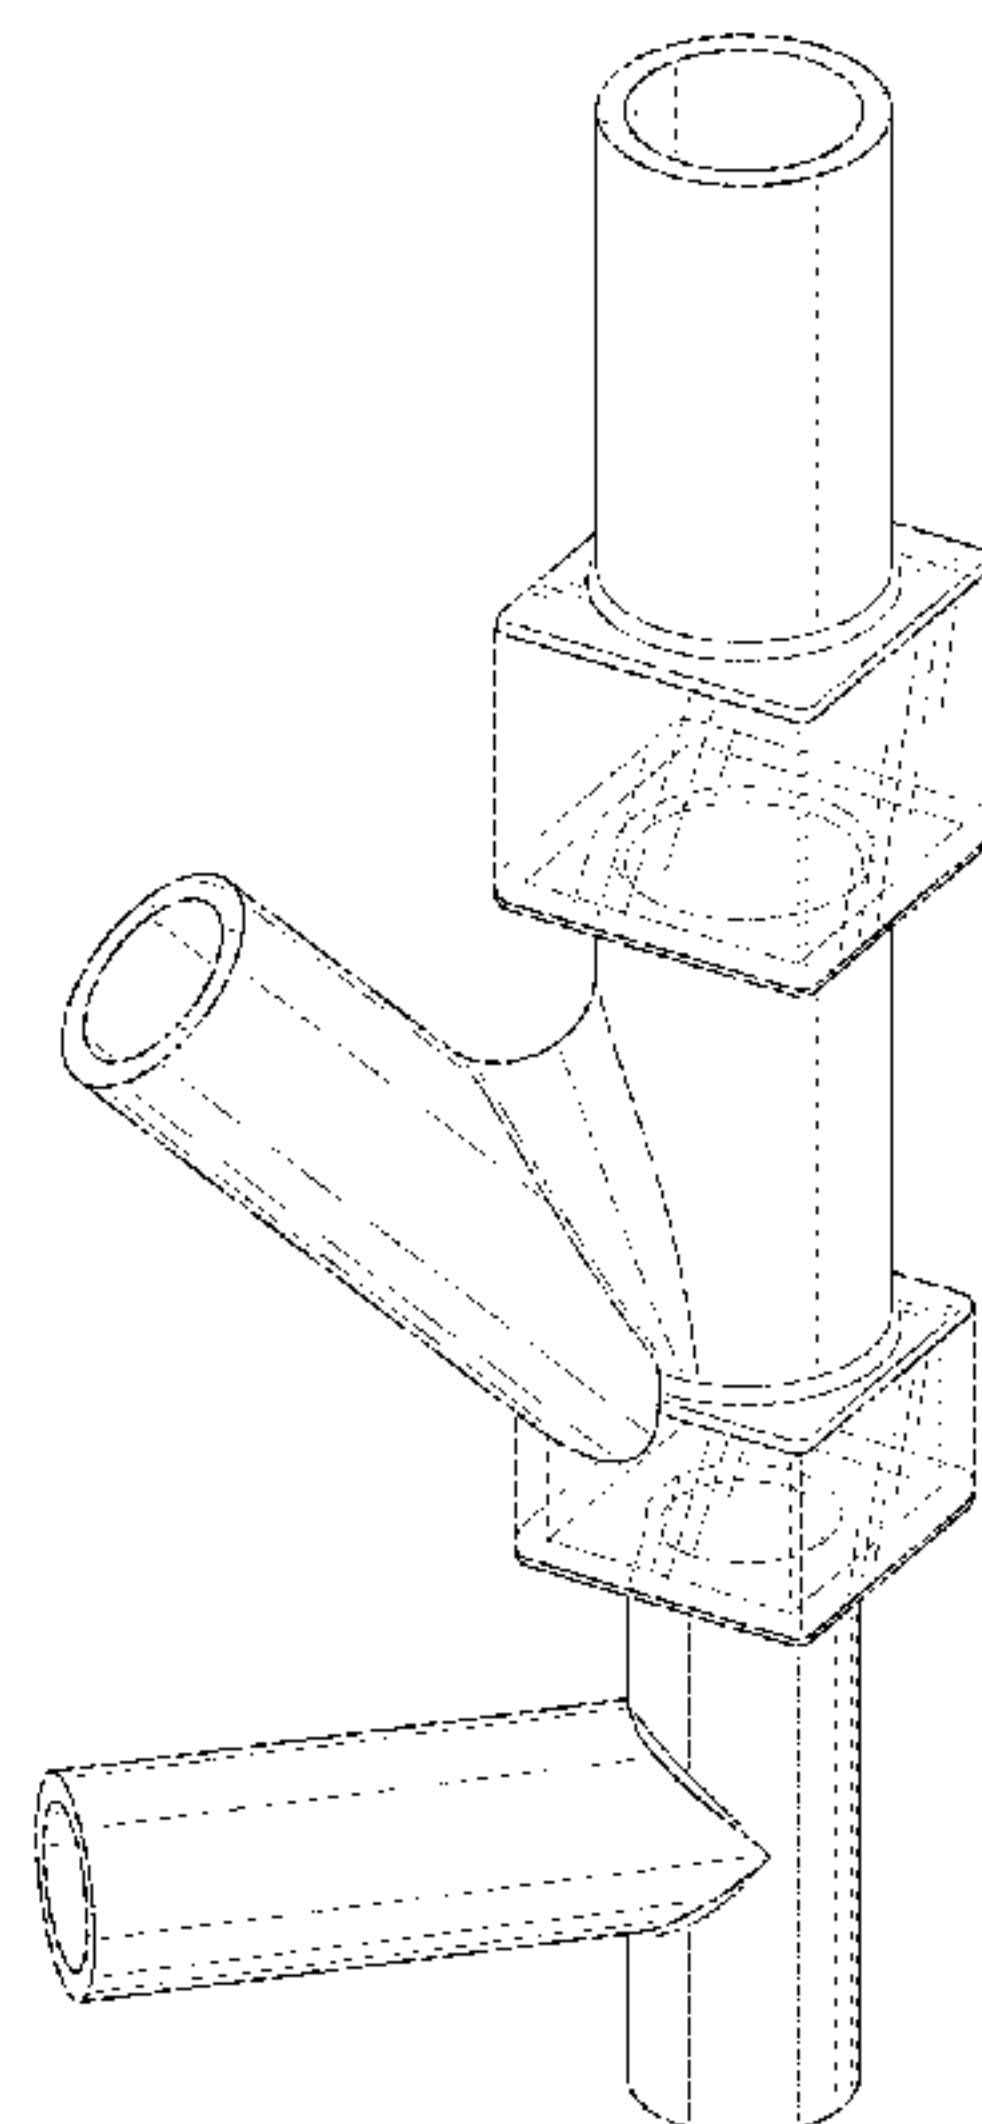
is a side elevation view of the front/right side of elutriation pipe assembly in opaque flow box mode.
